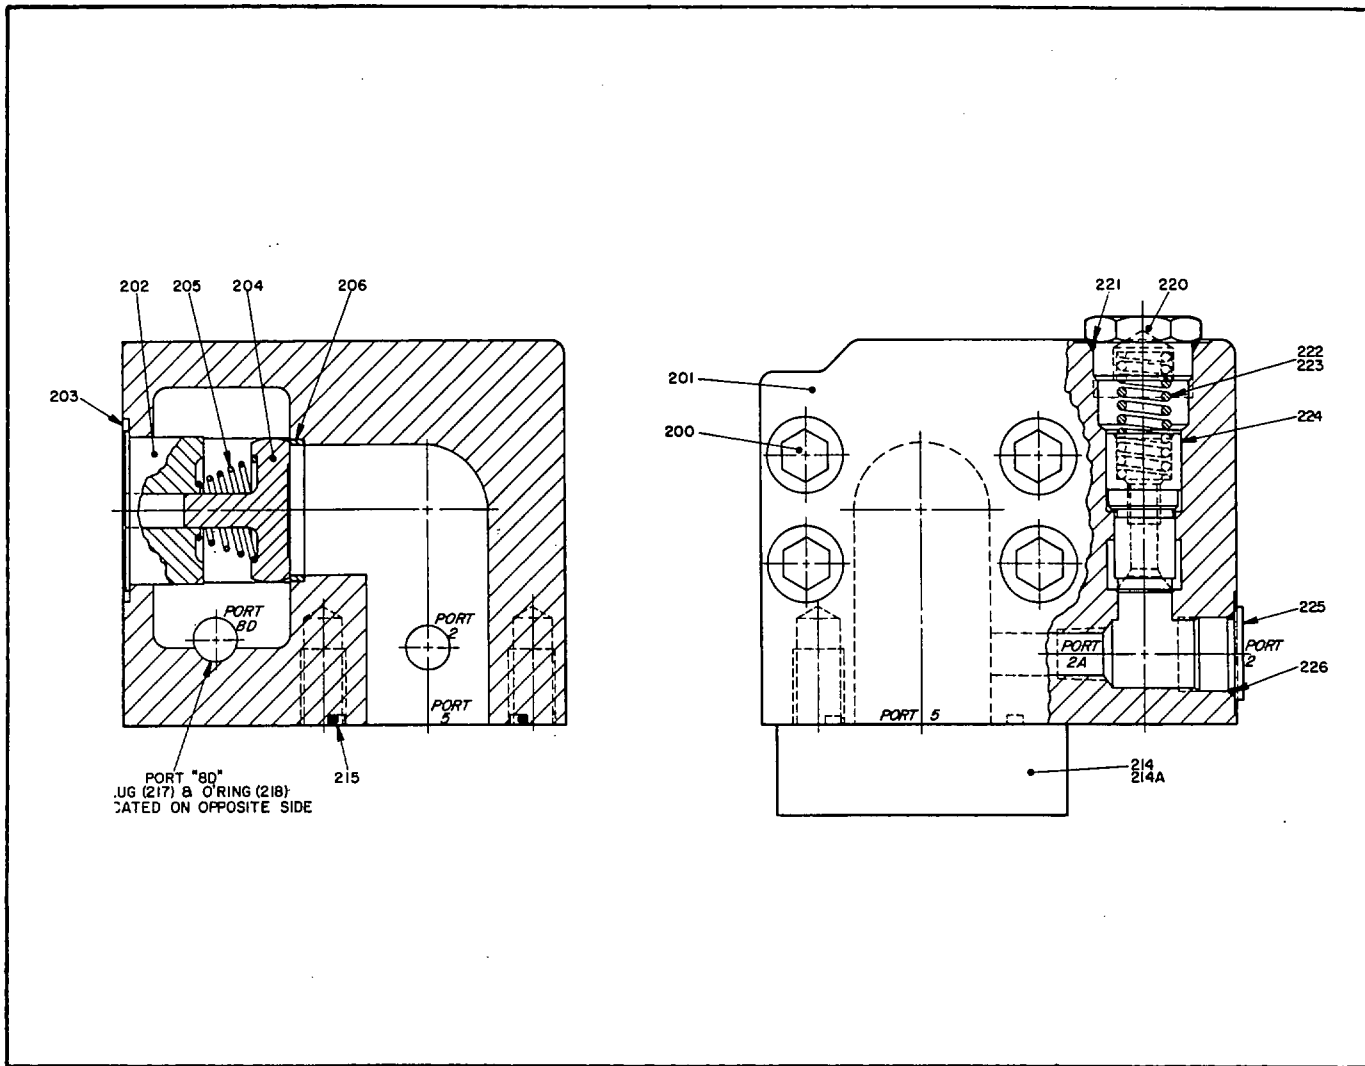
Parts Drawing "PFL" optional suction/supercharge manifold. DS-946077-B (509876-B).
